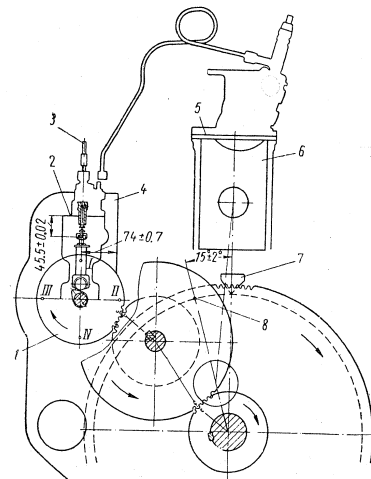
Fuel Pump Adjusting Diagram for Checking the Beginning of Fuel Injection by the 1st Section:
